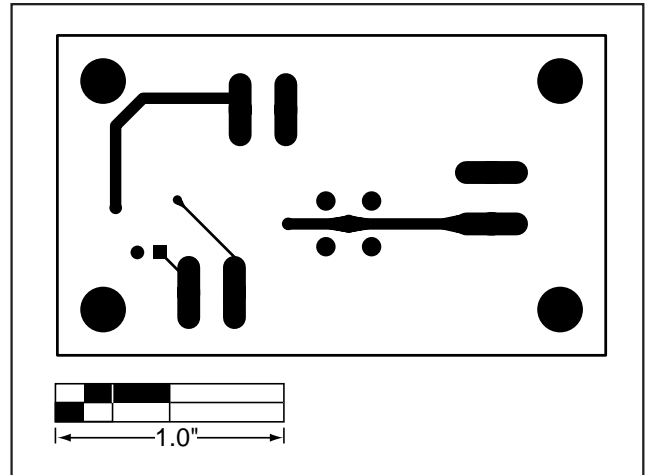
MAX881R EV Kit PC Board Layout—Solder Side
